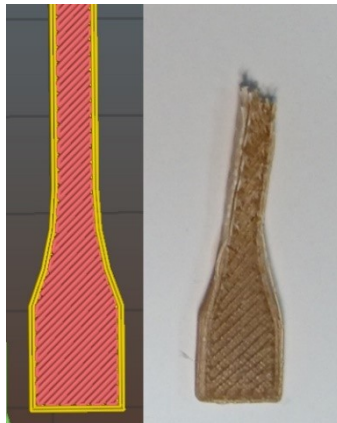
Infill $\pm 45^\circ$ provided a fracture in the gauge length of the specimen. Sample PVA_10CNC.
